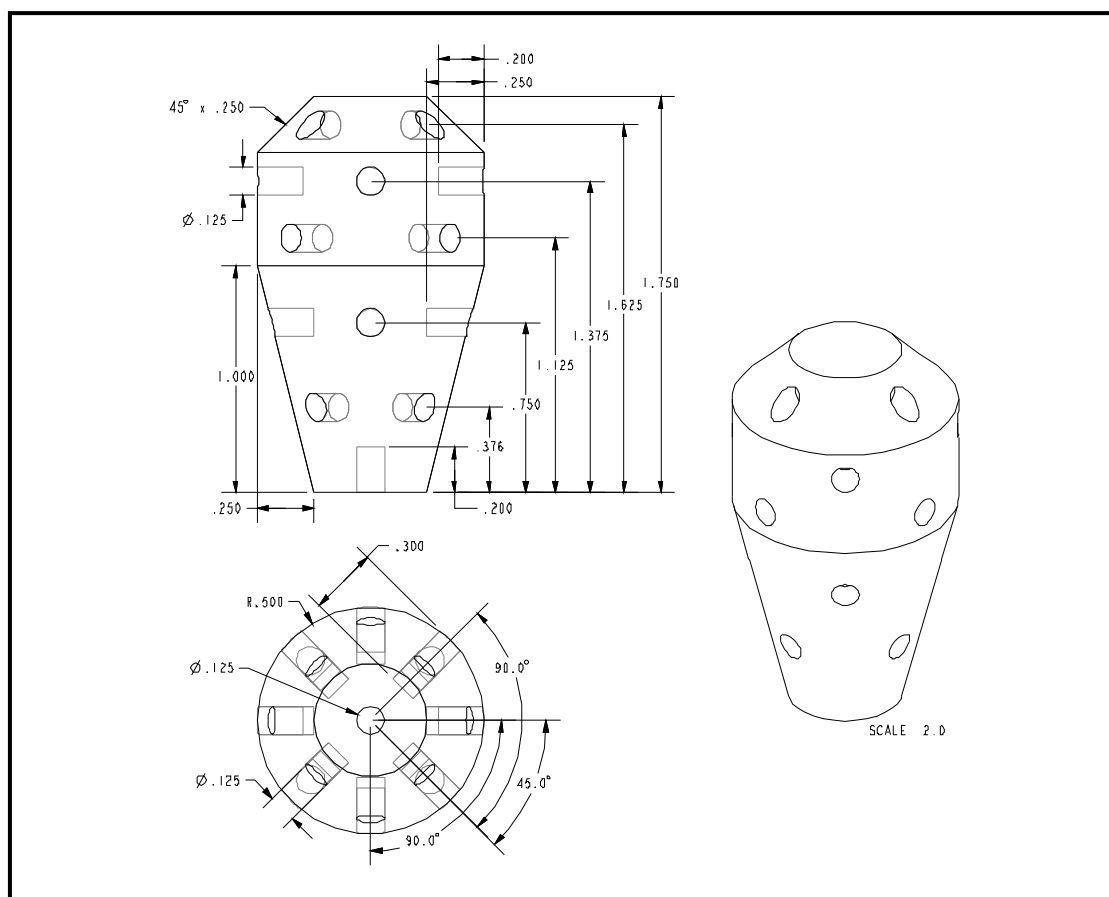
CAD Drawing of the Multi-Sampling Port JSR Mold – Cavity Mold
